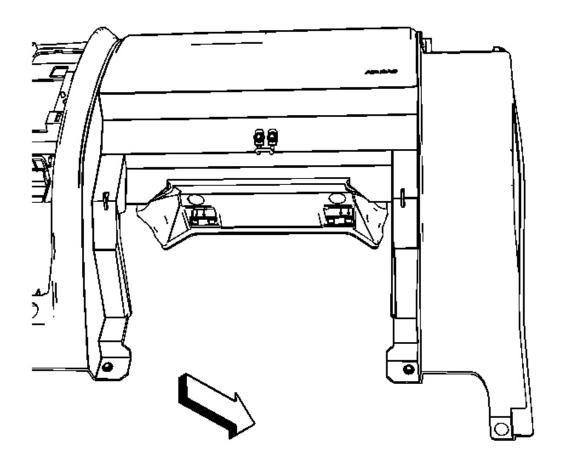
View Of Service Panel Courtesy of GENERAL MOTORS CORP.
